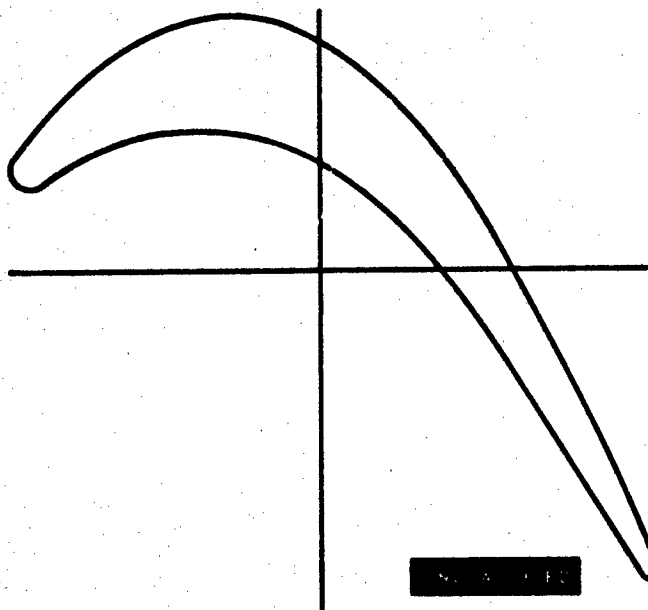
Section D-D, First Blade 1/4 Tip, Planar
